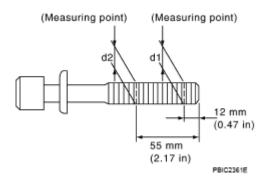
Identifying Cylinder Head Bolts Outer Diameter
